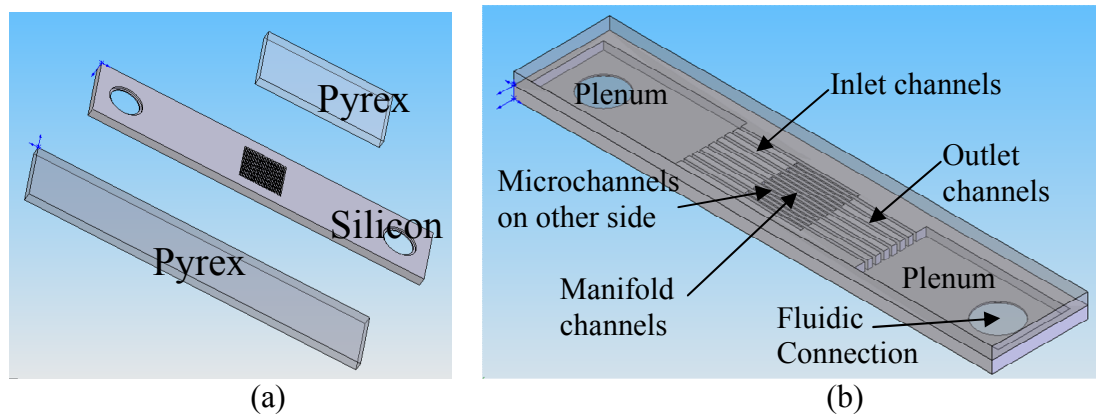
Schematic views of MMC1 (a) three layer exploded view (b) labeled with the main parts
